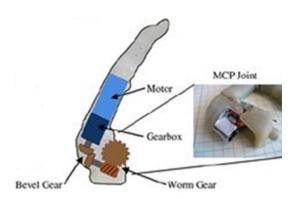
iLimb finger (Touch Bionics) is actuated in same manner as Vincent finger but uses set of bevel gears between motor and worm drive. MCP = metacarpal phalange.
